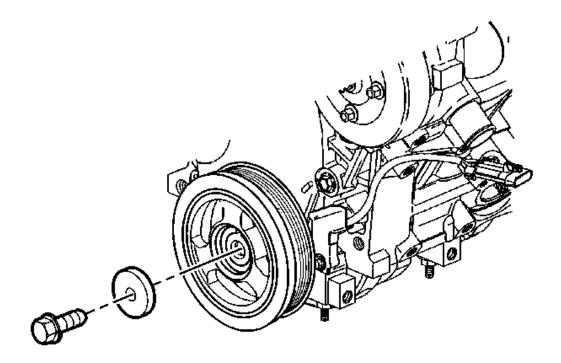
Installing Crankshaft Washer & Bolt Courtesy of GENERAL MOTORS CORP.
